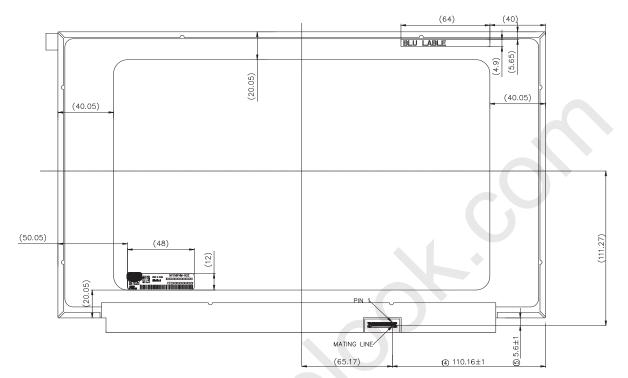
TFT-LCD Module Outline Dimensions (Rear view)
